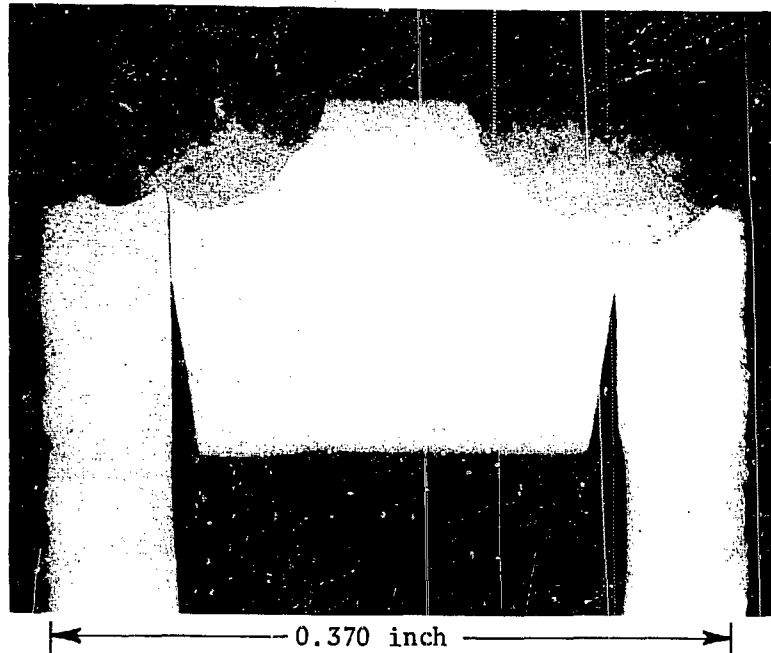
Model SR-Cf-100 Series Outer Capsule Weld-Section (Type 304L Stainless Steel)
